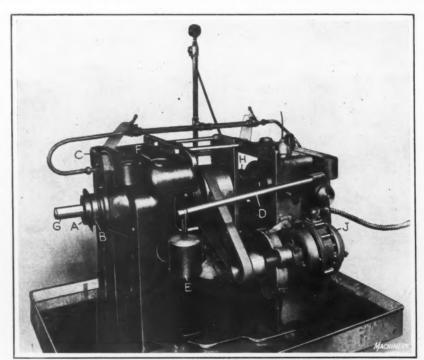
Running-in Device for Gear Shaper Work-spindle
